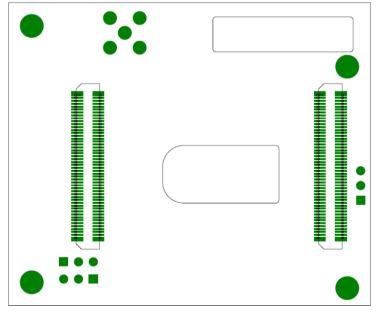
WISMO Series Socket-Up Board Assembly (Bottom View)
